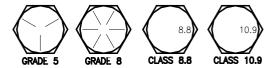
SAE Bolt Head Markings & Metric Class
